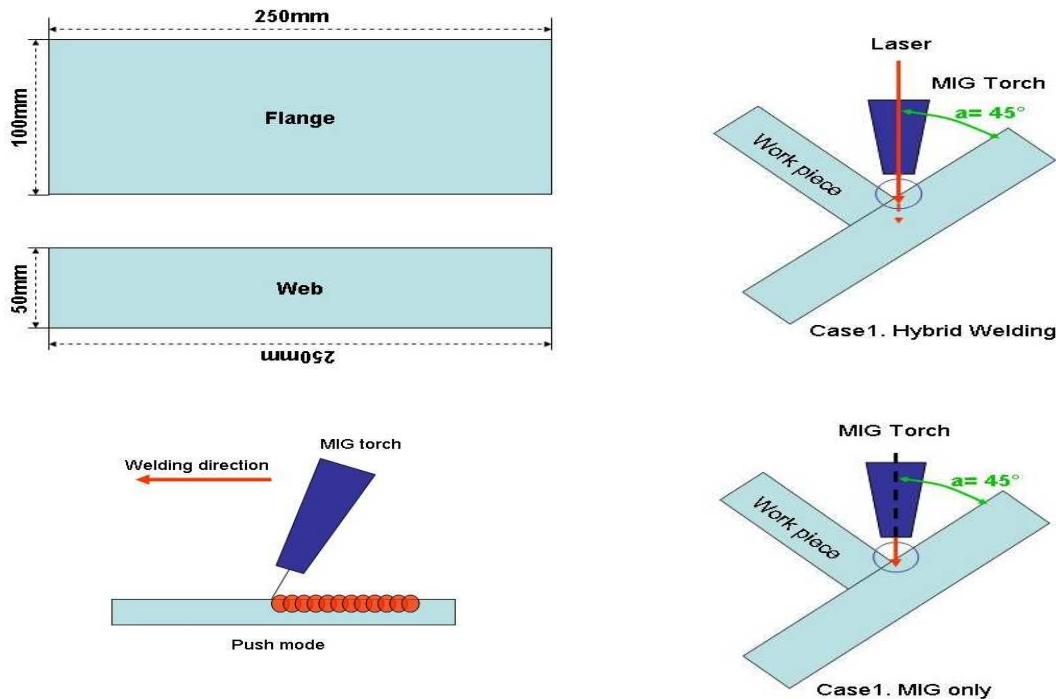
4 Principle of experimental set-up for welding process
